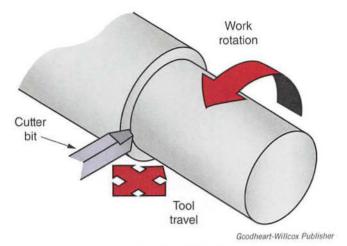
The lathe operates by rotating the work against the edge of a cutting tool.
